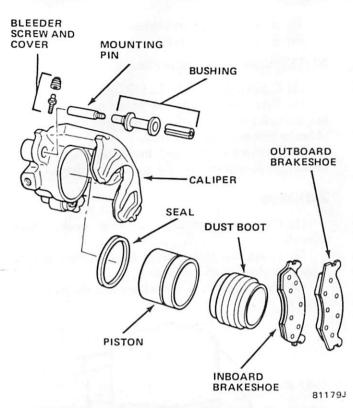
G-52 Caliper Assembly—CJ and Scrambler Models
